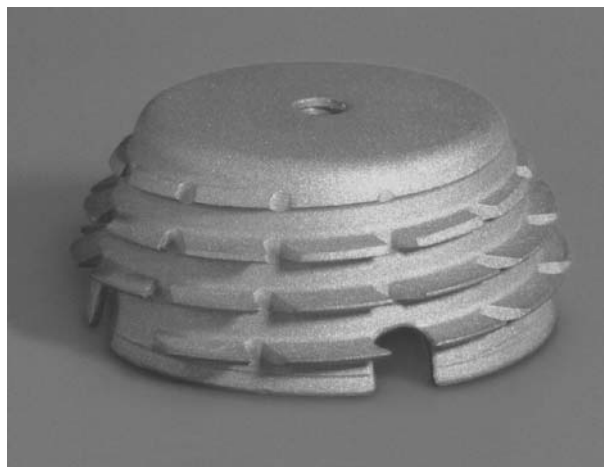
Double threaded Zweymueller cup with corundum blasted surface
